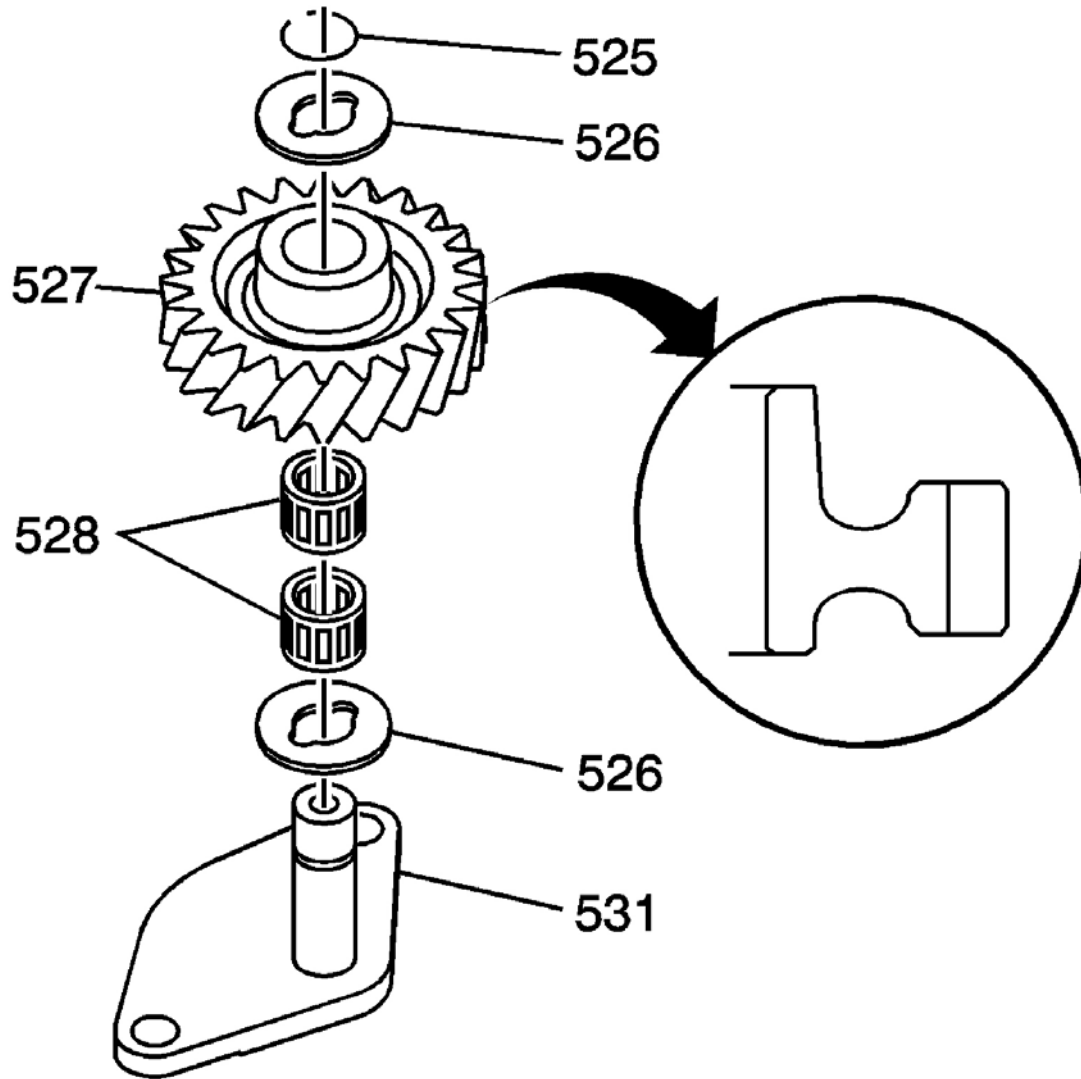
Installing Reverse Idler Gear Returning Plate Assembly
